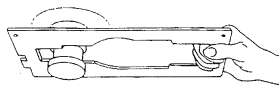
INSPECTION OF KINGPIN DIAMETERS USING ONE TYPE OF GAUGE
